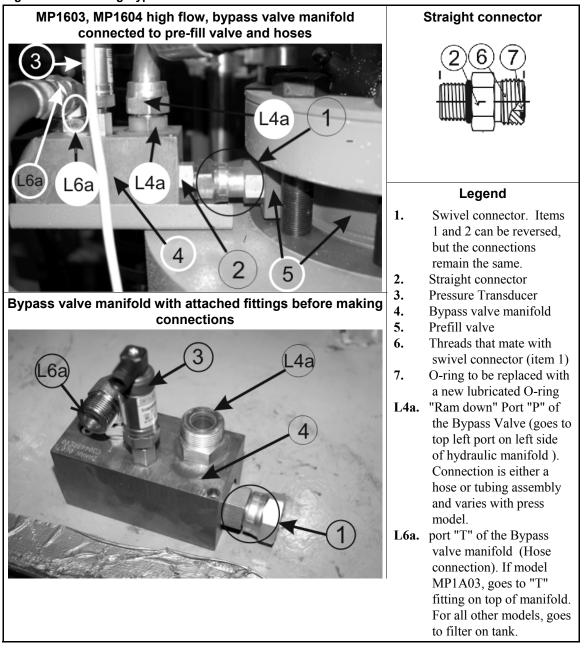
Connecting Bypass valve manifold to Pre-fill valve
